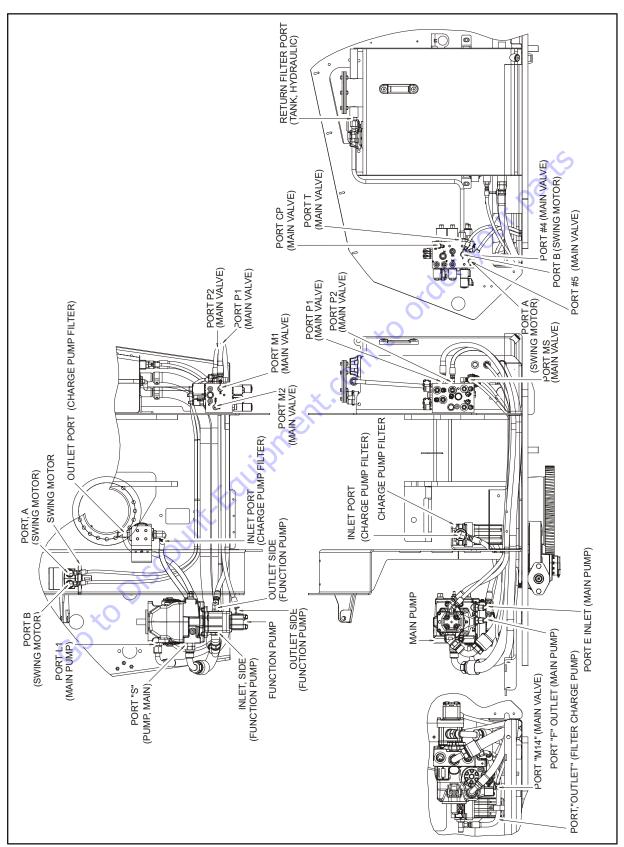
Drive Pump to Main Valve/Tank Hydraulic Lines
